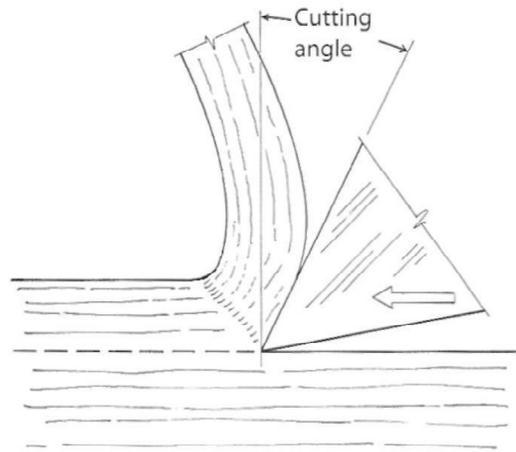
At small cutting angles, the face of the knife produces more forward compression than upward lifting. Failure occurs as a diagonal plane of shear right at the cutting edge. With enough force and a thin chip, the workpiece surface can be left in excellent condition. This is a Type II chip in  $90^\circ\text{-}0^\circ$  cutting [4].
